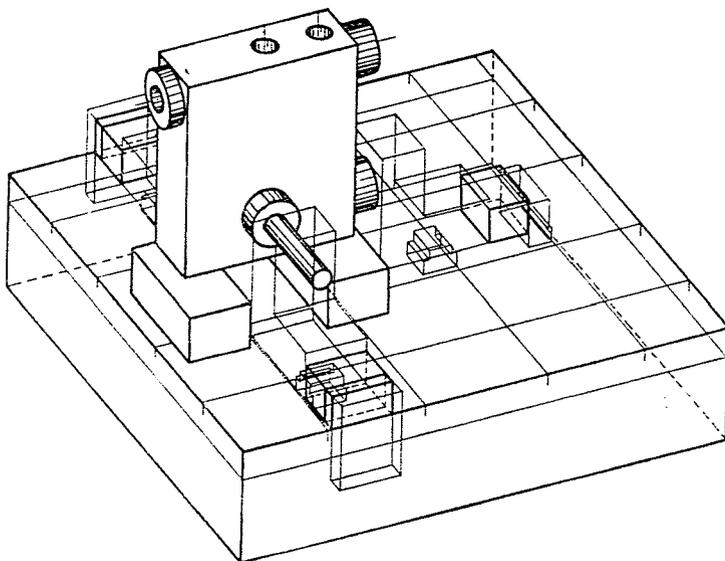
Display of a workpiece clamping fixture from an arbitrary viewpoint
